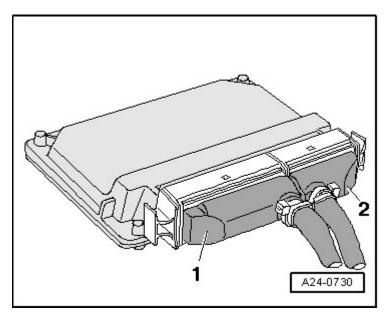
Engine Wiring Harness Connector Courtesy of AUDI OF AMERICA, LLC
